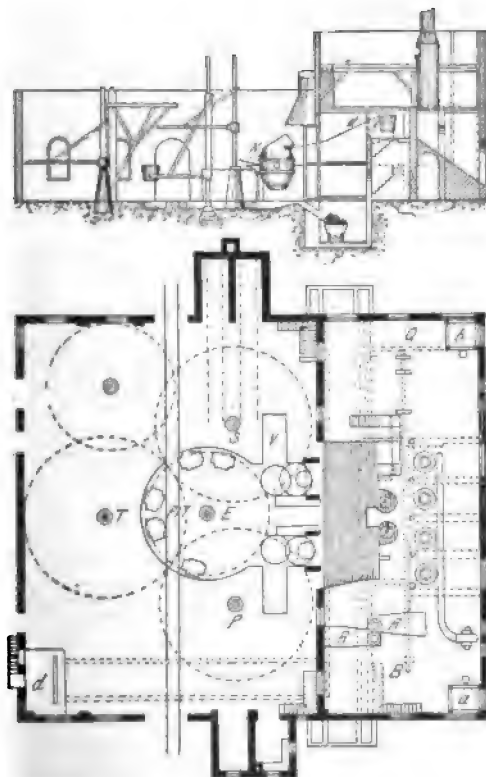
Plan and Sectional View of a Bessemer-steel Plant.
